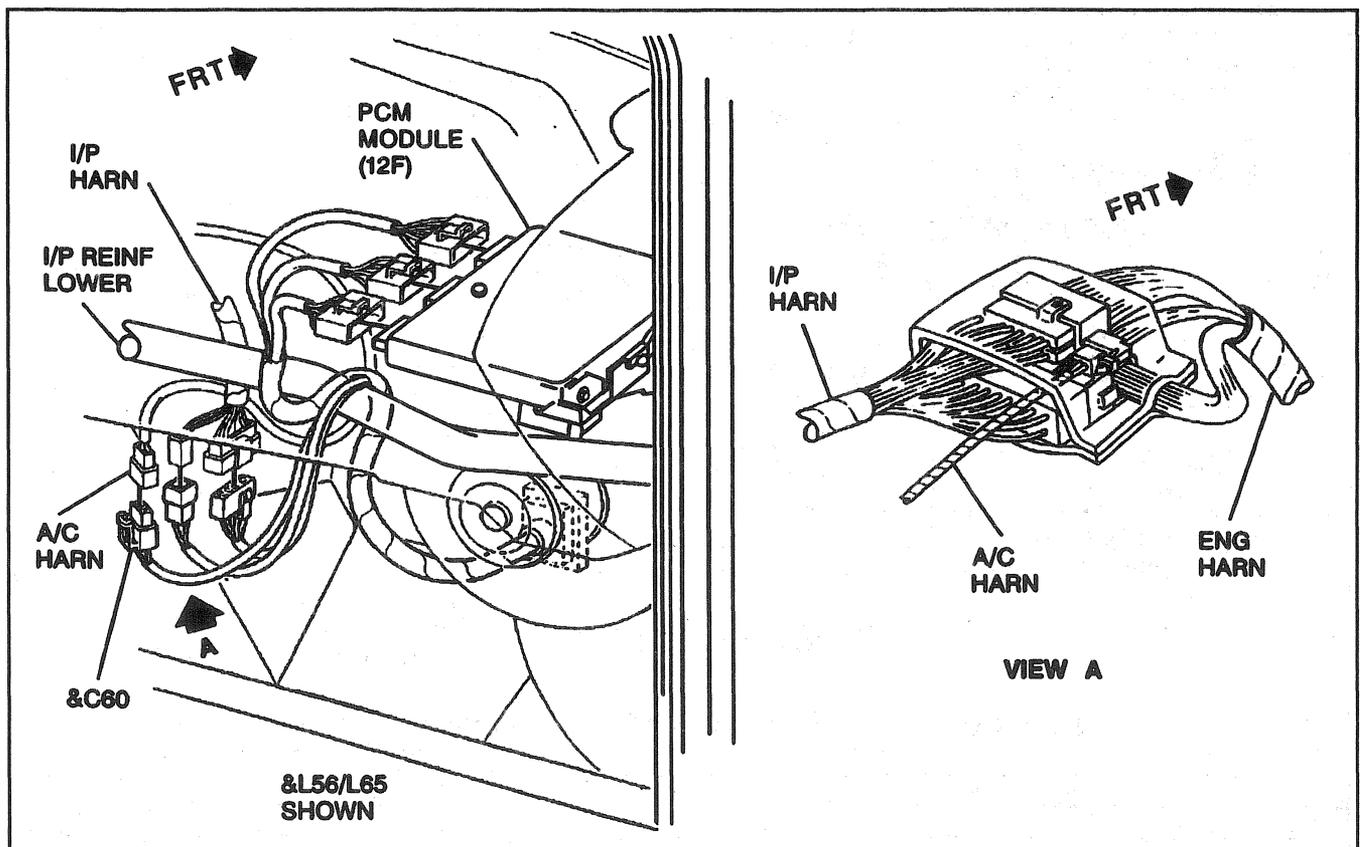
Engine Wiring to the Control Module (Gas Engines)
